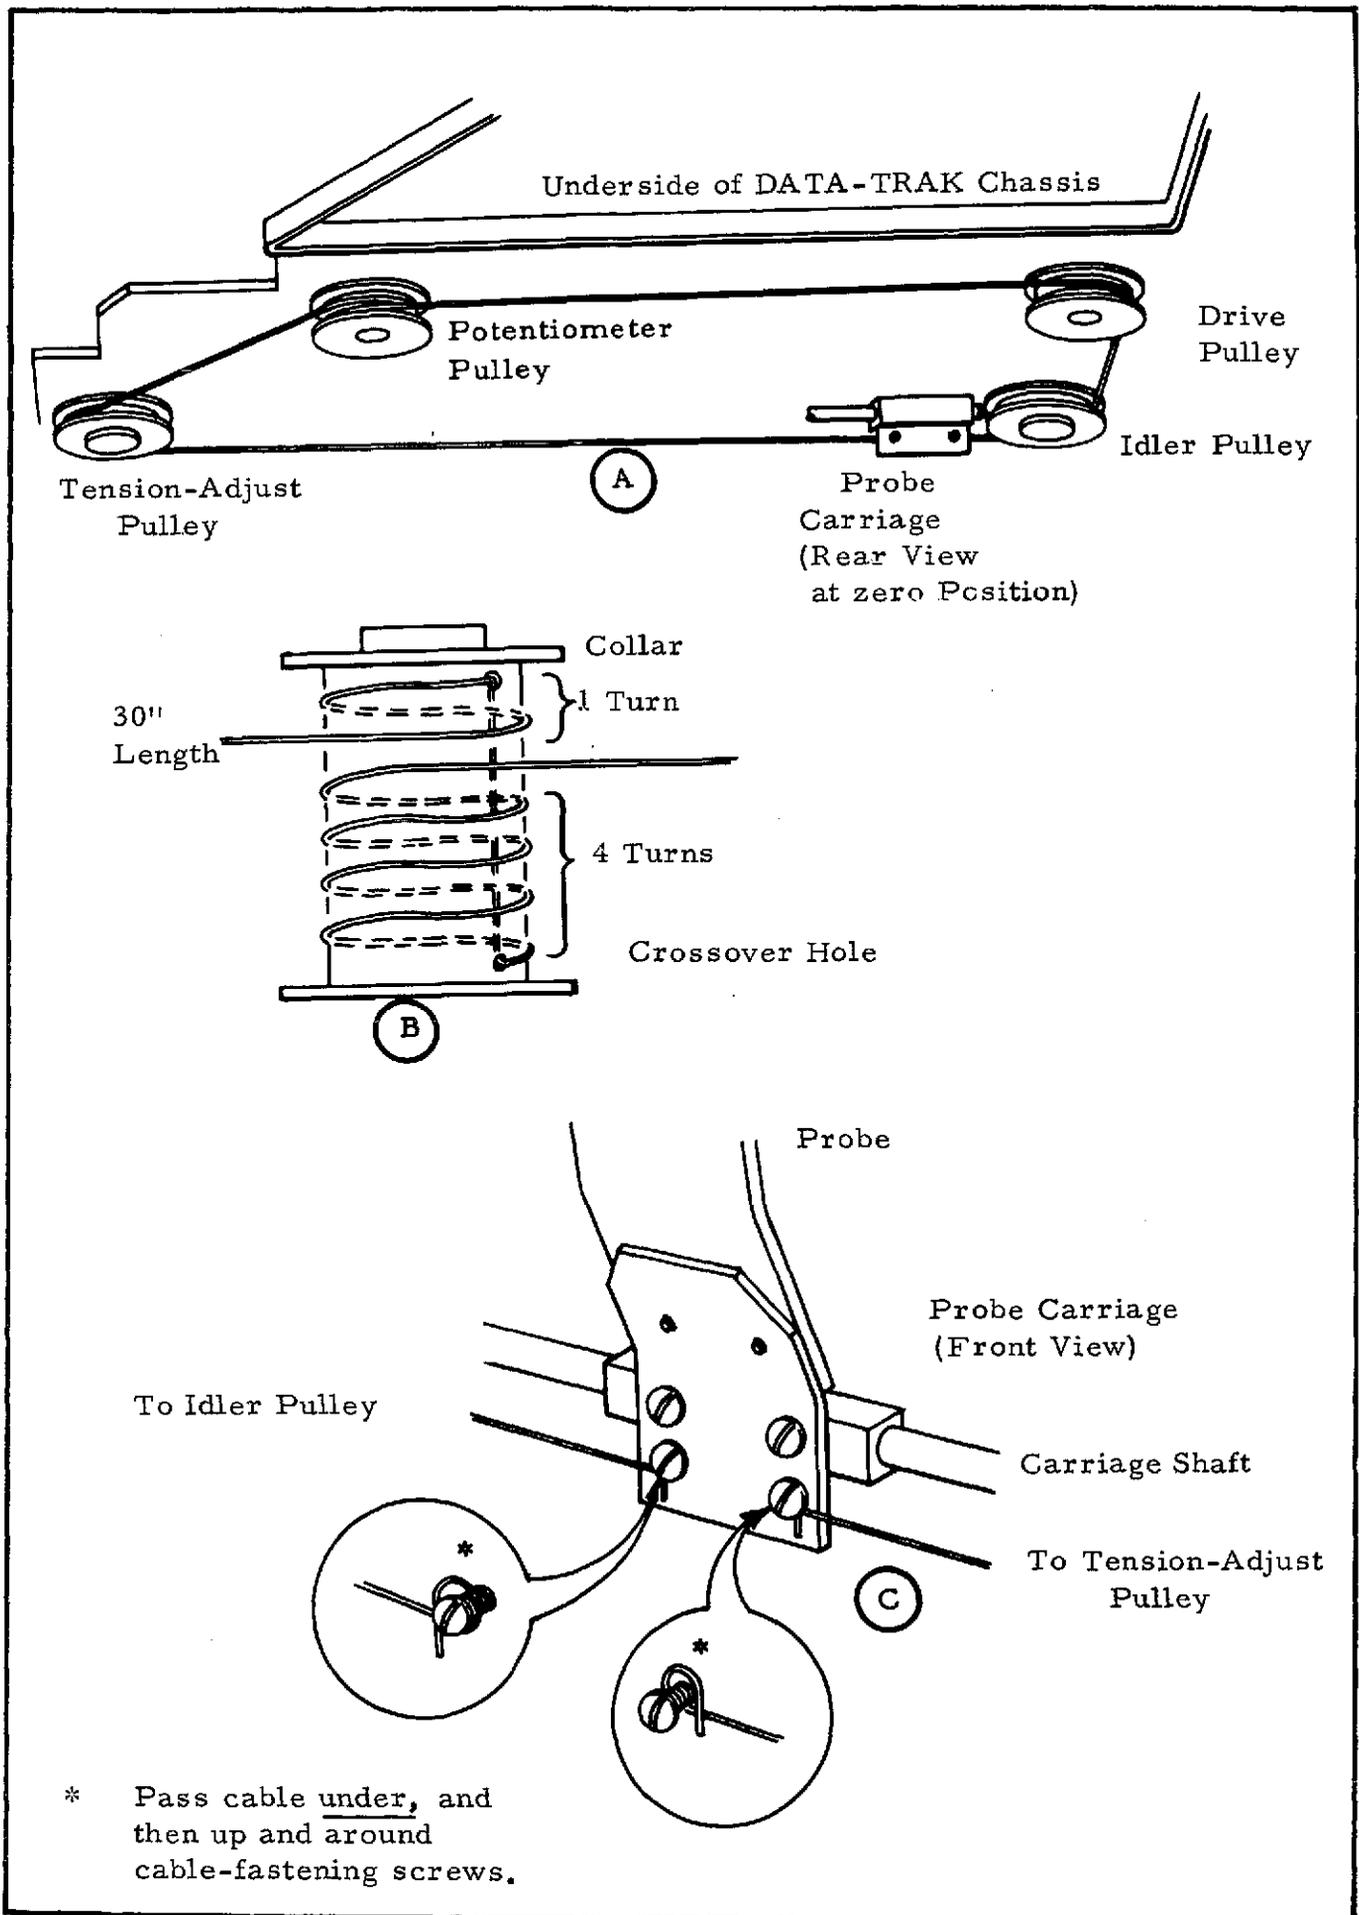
DRIVE-CABLE WIRING SYSTEM
